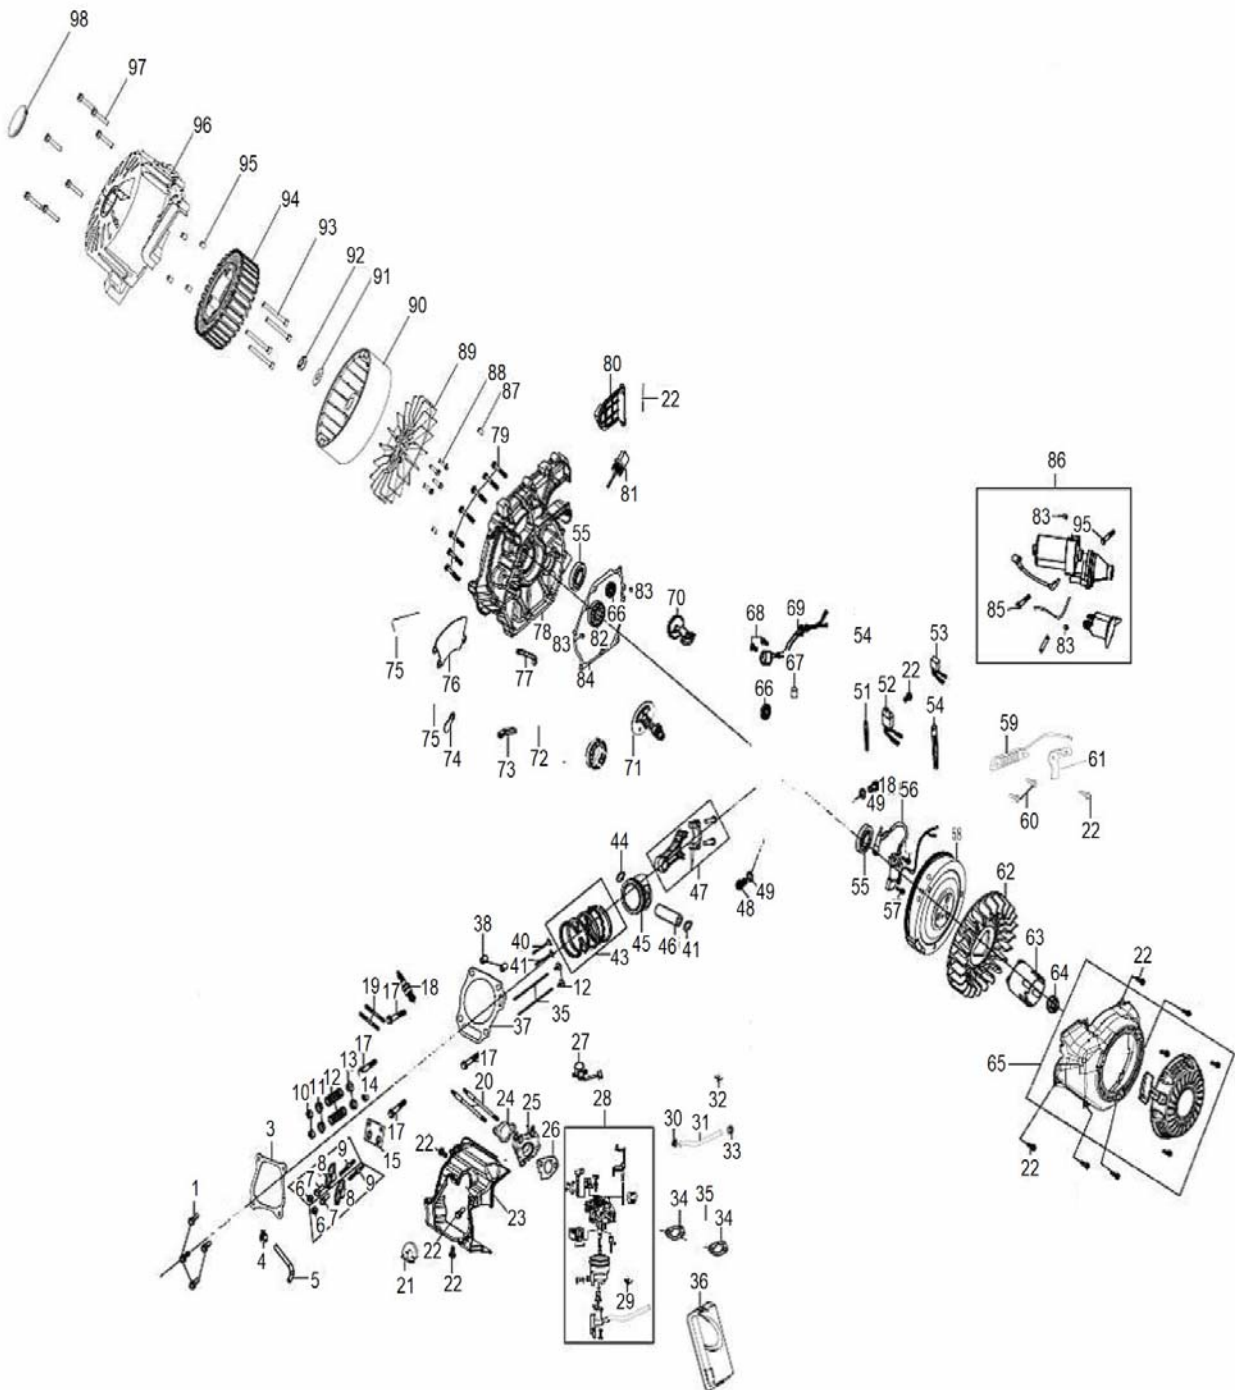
Spare parts drawing 2 PG-I 80 SE
